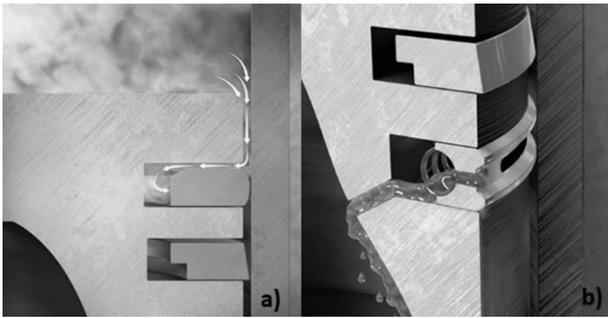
a) Isolation of exhaust gases by 1 ring, b) lubrication of the cylinder surface by wiper rings [8]
